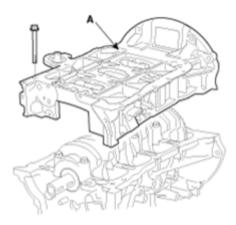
Identifying Ladder Frame Courtesy of KIA MOTORS AMERICA, INC.
